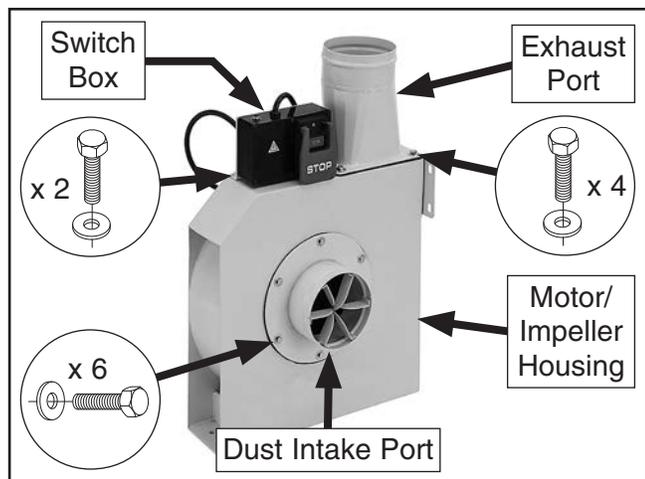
Dust intake port, exhaust port, and switch box attached to motor/impeller housing.
